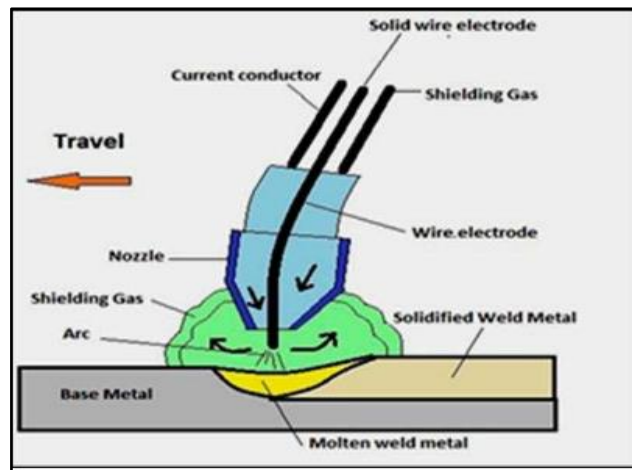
Working principles of MIG welding (Singh and Goyal, 2017)
